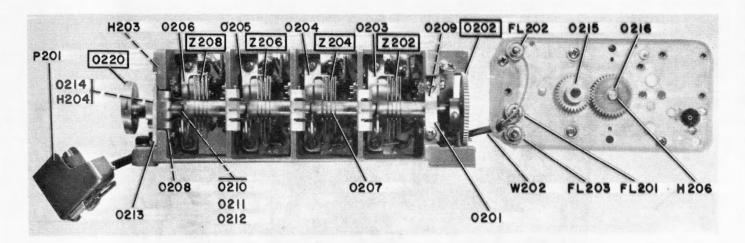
Frequency Multiplier-Oscillator, Bottom View, Master Oscillator Removed
